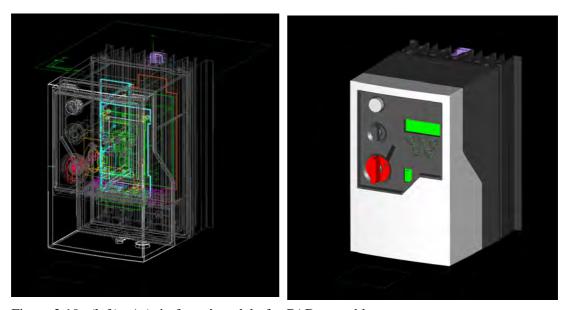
(left). A 'wireframe' model of a CAD assembly.
